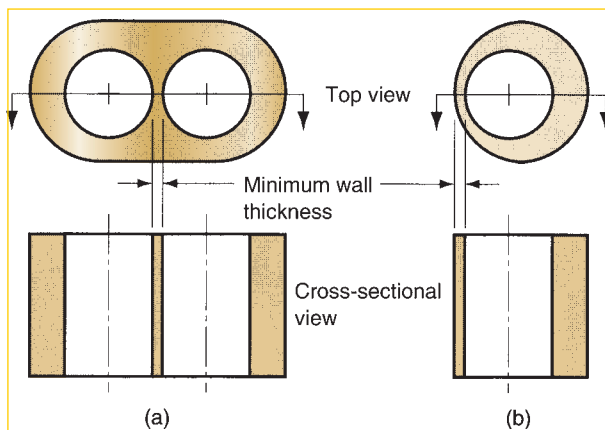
Minimum recommended wall thickness (a) between holes or (b) between a hole and an outside wall should be 1.5 mm (0.060 in.).
